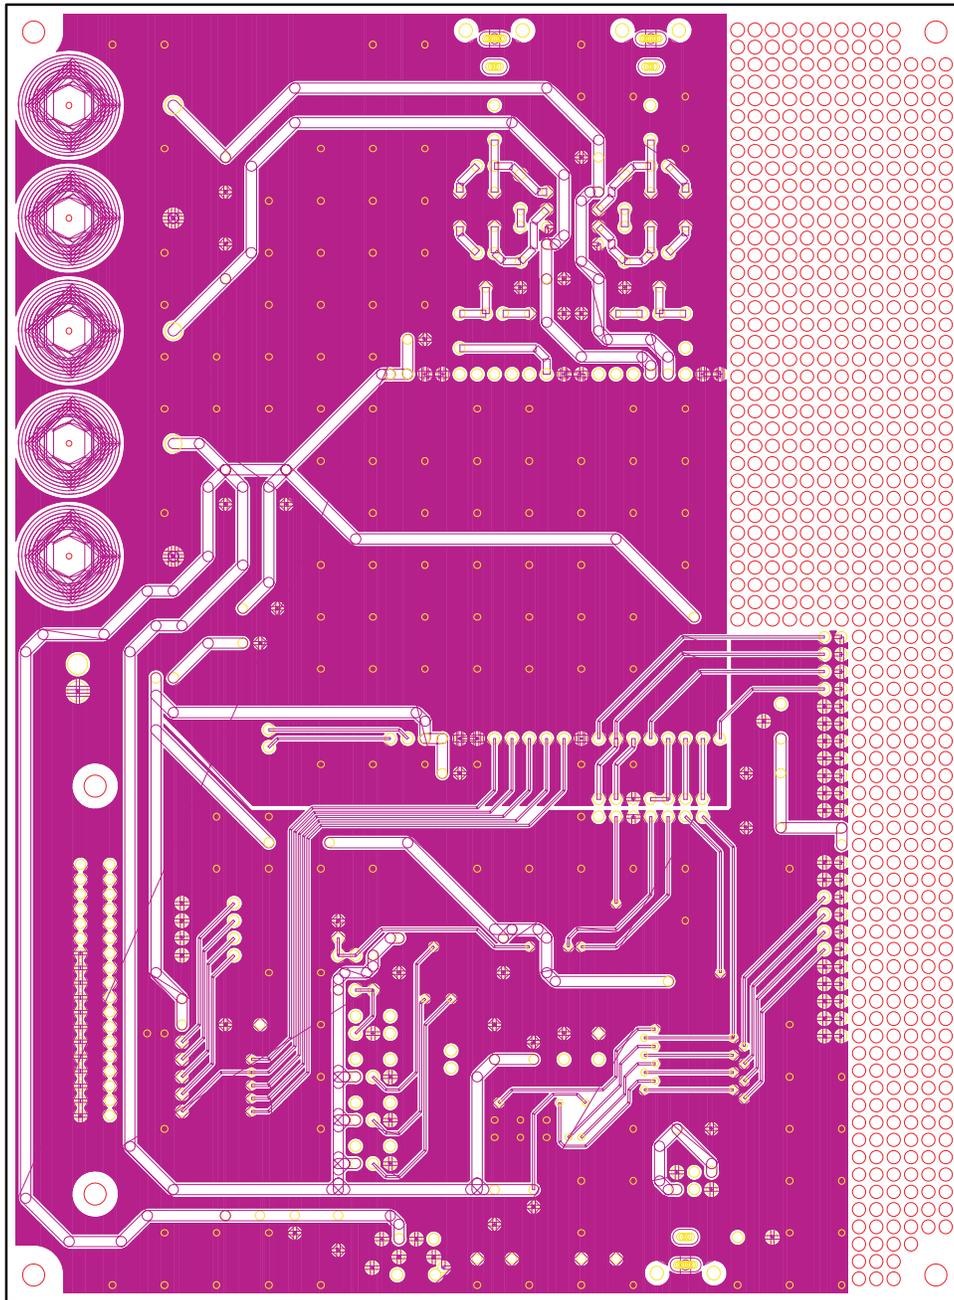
DEM-DAI/DAC Board Layout—Bottom View
